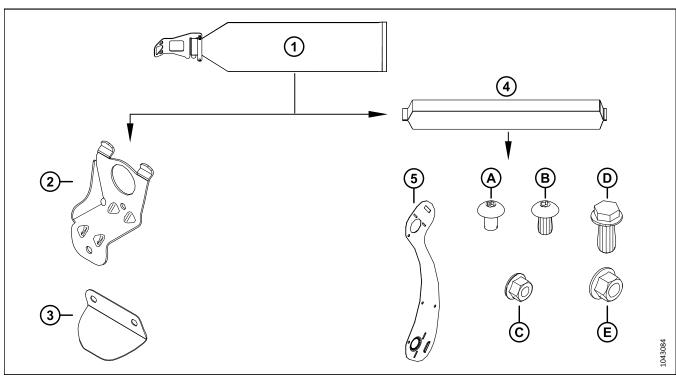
Center Reel Parts Retrieved from Parts Bag MD #368325
